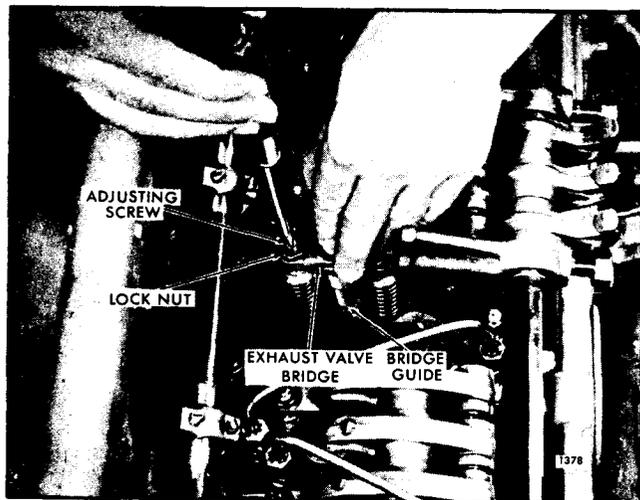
Exhaust Valve Bridge Adjustment (Four Valve Cylinder Head)
